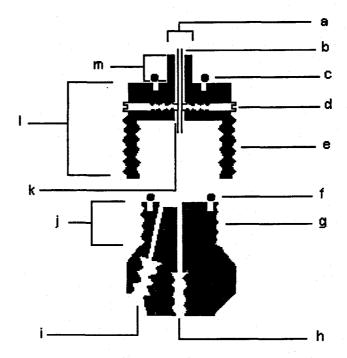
Schematic of the Second Delrin Injector. For this final version of the reactant injector, there are three sections, top and bottom Delrin section and a 22-gauge stainless steel tube for the inner conduit of the concentric injection port. The key measurements are: (a) nozzle head diameter, 0.202-in; (b) 22-gauge stainless steel tube, 1-in long, 0.016-in od, 0.028 in od; (c) "O" ring seal; (d) alignment screws; (e) 1-32 threads; (f) "O" ring seal; (g) 3/4-32 threads; (h) 1/4-28 threads for tubing connection for inner conduit of the injector; (i) 1/4-28 threads for tubing connection for annular conduit of the injector; (j) 0.318 in; (k) 0.033-in diameter pathway/opening for the annular conduit of the injector; (l) 0.598 in; (m) 0.20 in nozzle height.
